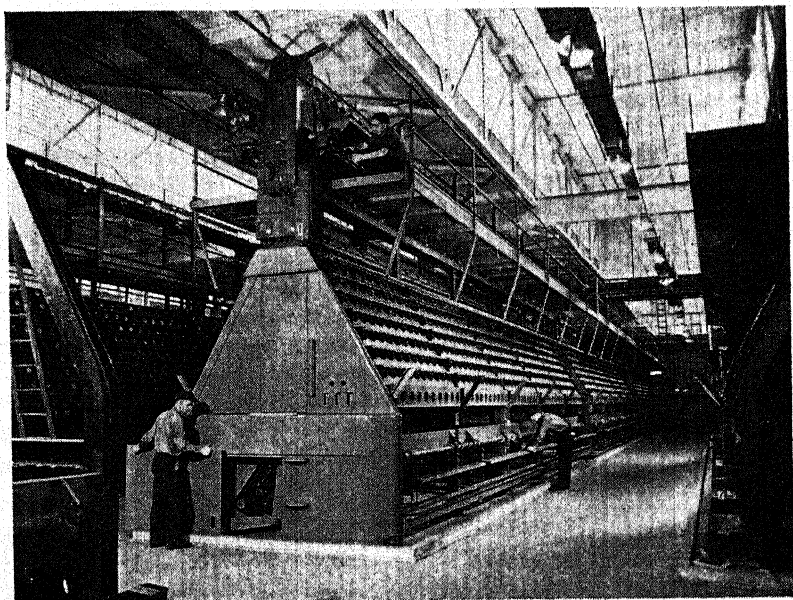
One of the arc welded continuous process rayon producing machines during construction.
